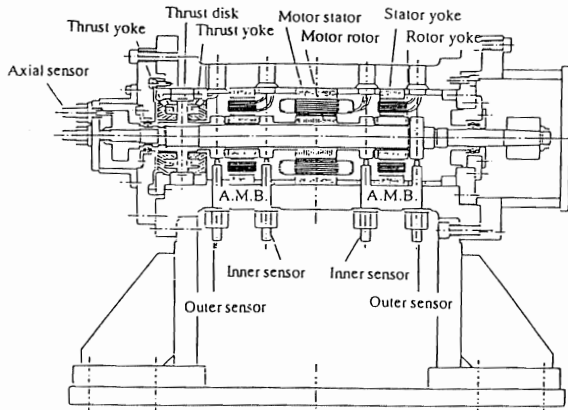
Test rig of flexible rotor magnetic bearing system with five-axis control
